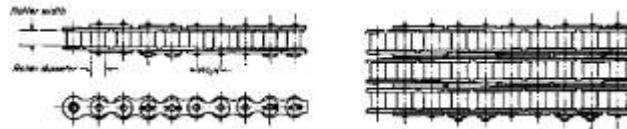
Standard roller chain. Figure courtesy of Paul E. Sandin [33].
